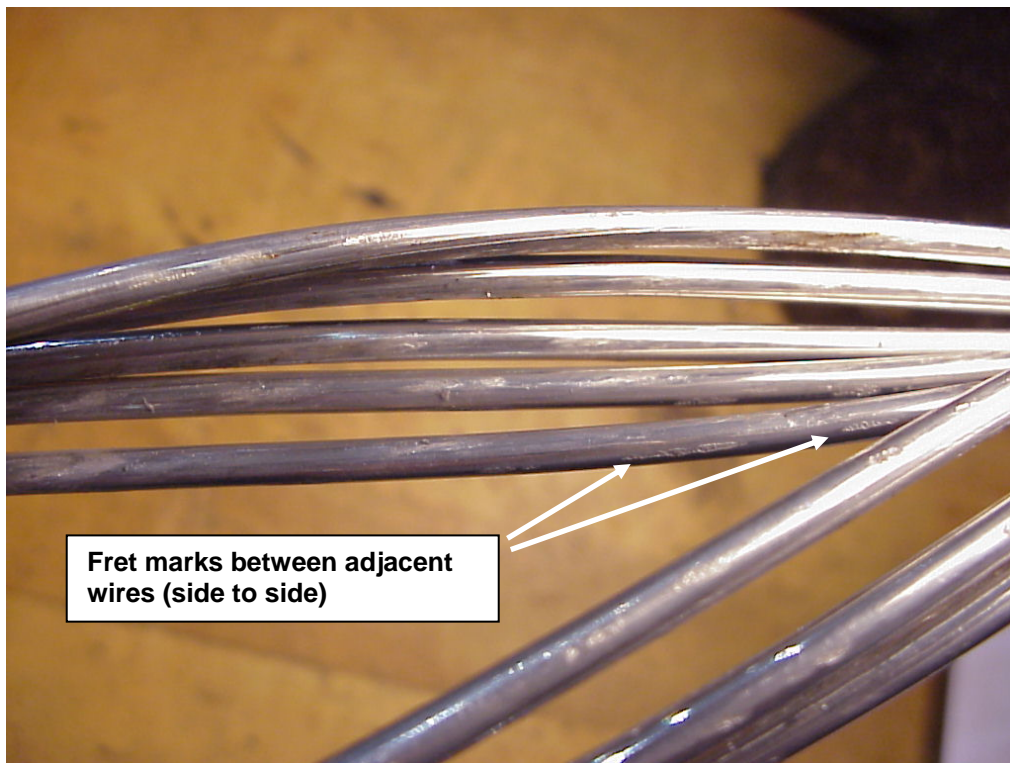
1<sup>st</sup> Layer Core – outer surface
